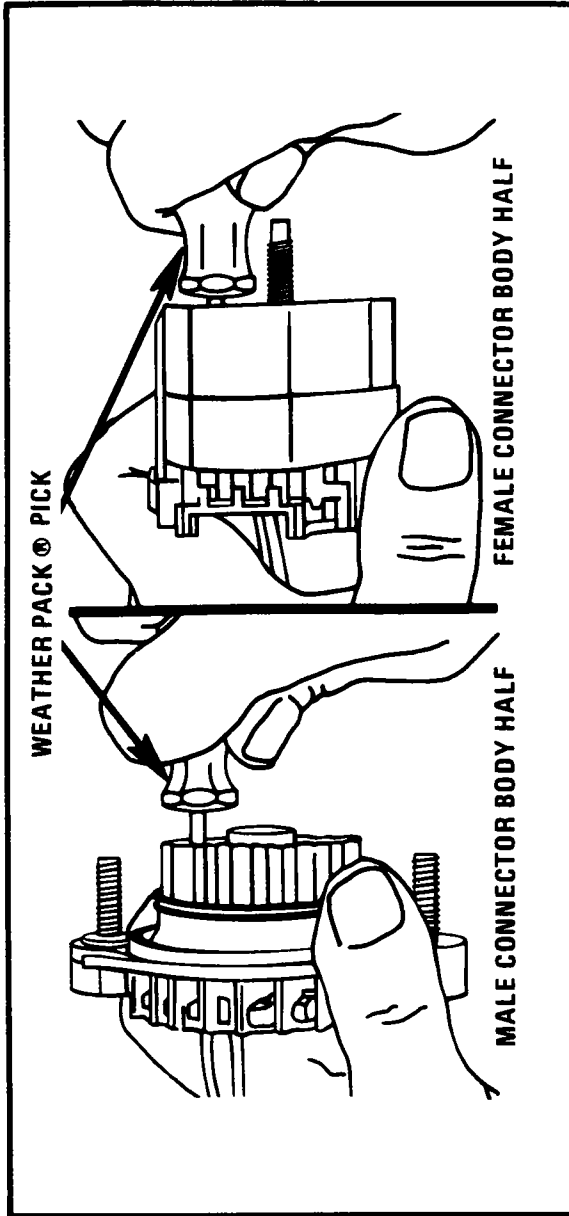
Releasing The Terminal Locking Tangs (Large Connector)
